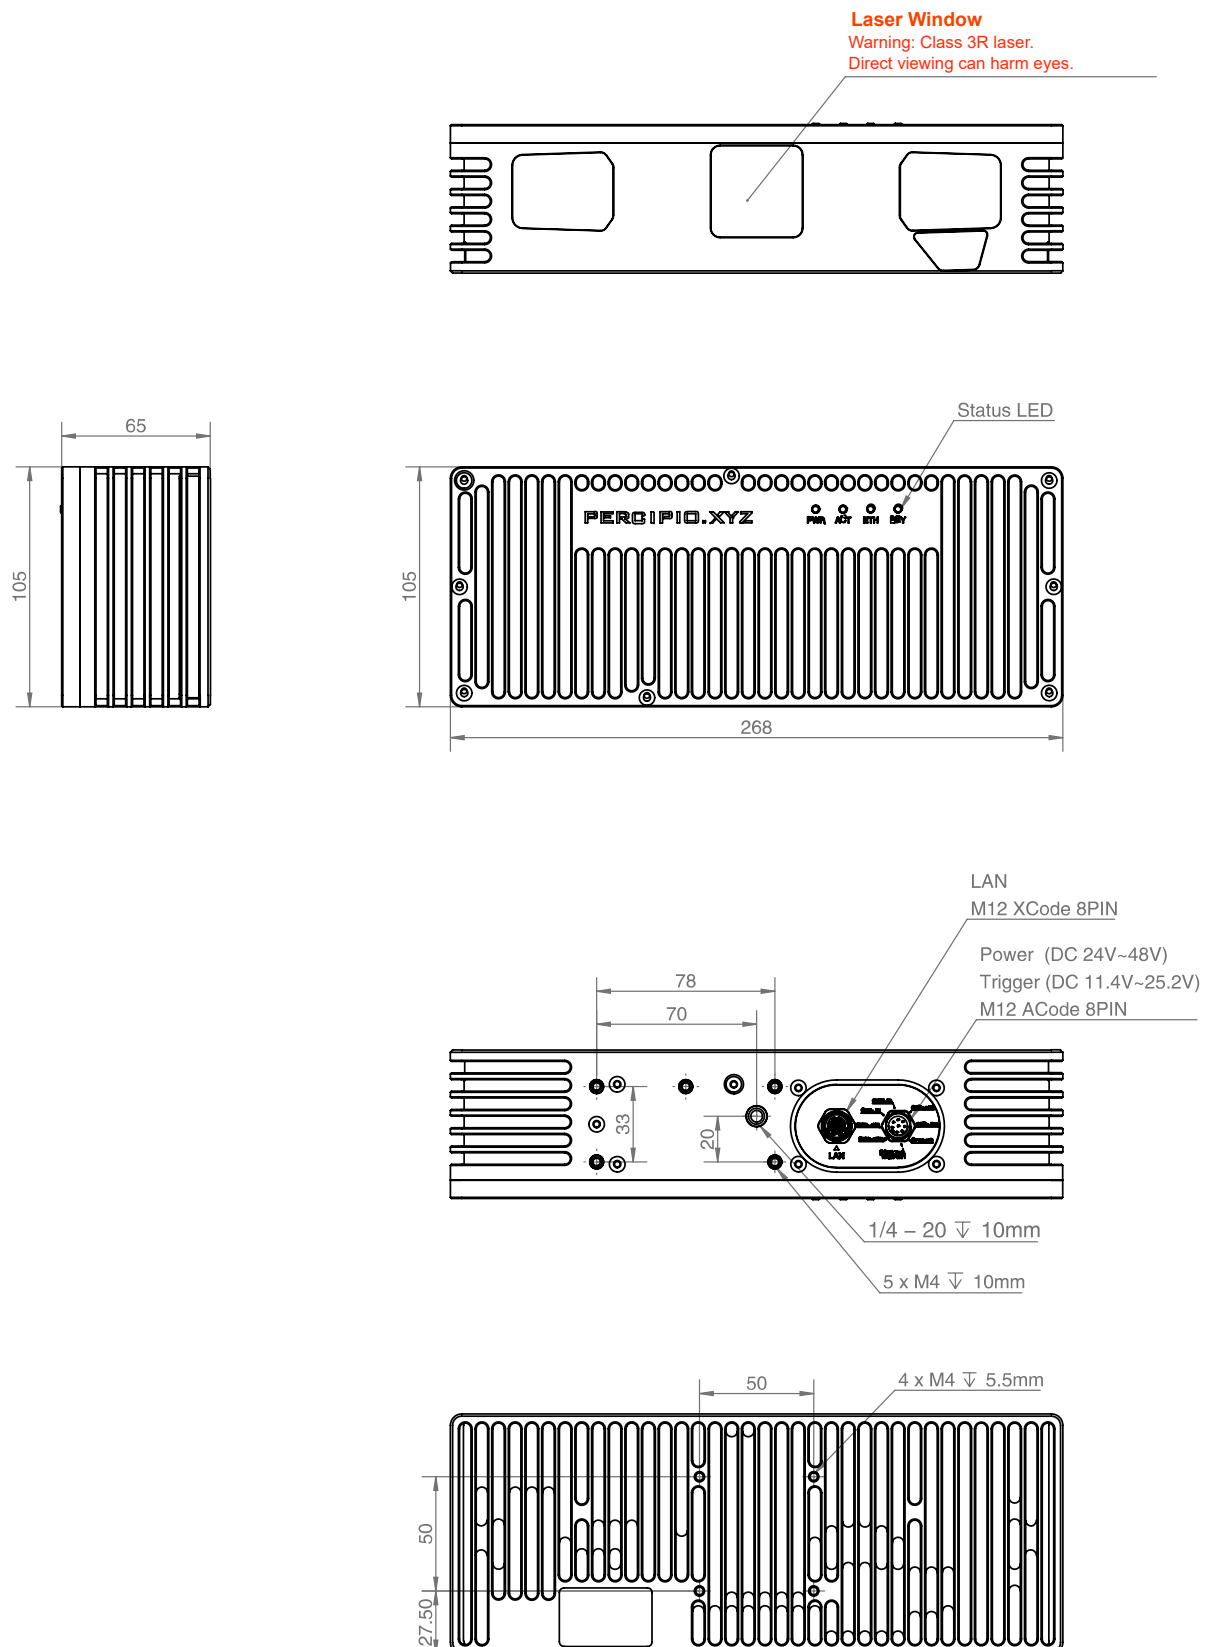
VMD02-5011 mechanical dimensions (unit: mm)
